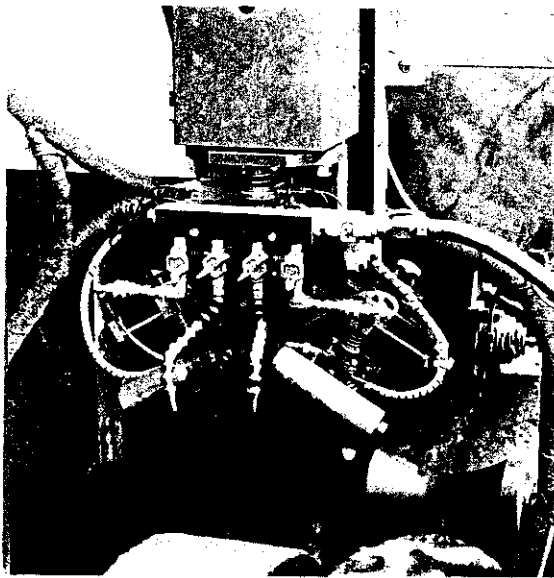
Appearance of multiprobe type weld flaw monitor
